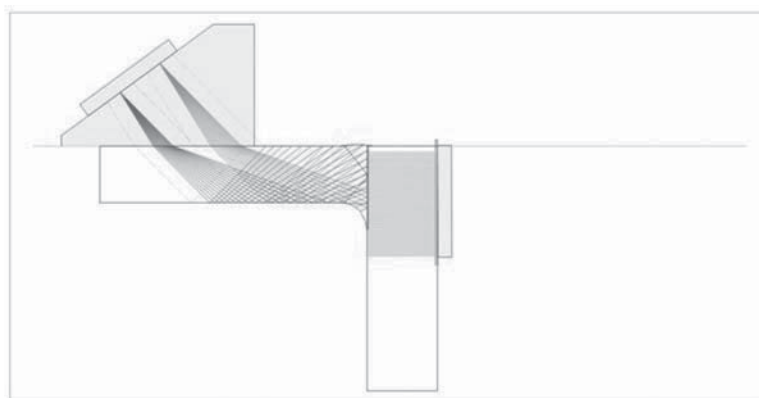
THICK BUTT WELDS (S- AND E-SCANS)
